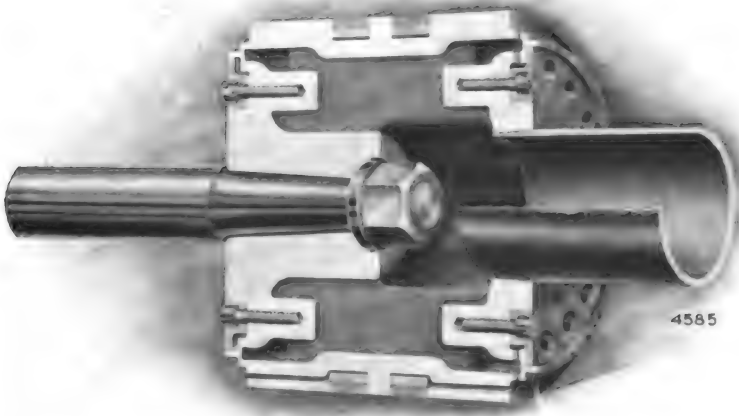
Ingersoll-Rand "Hurricane Inlet," Enlarged Section.
